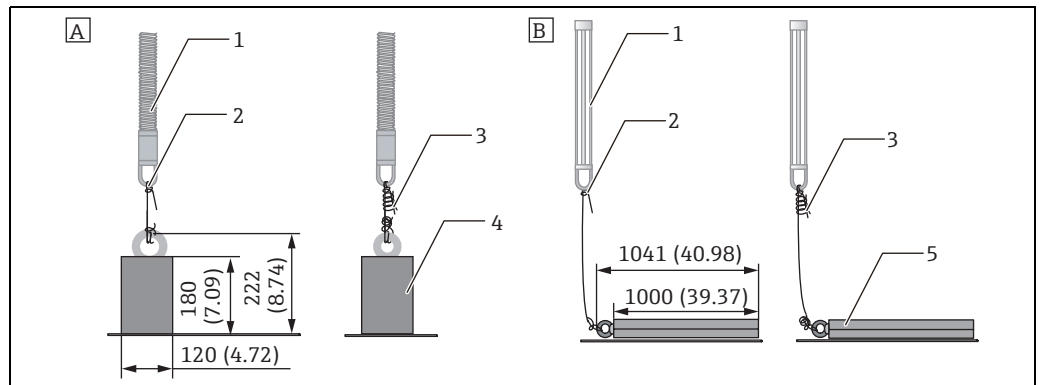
Anchor weight attachment, Unit of measurement: mm (in)
